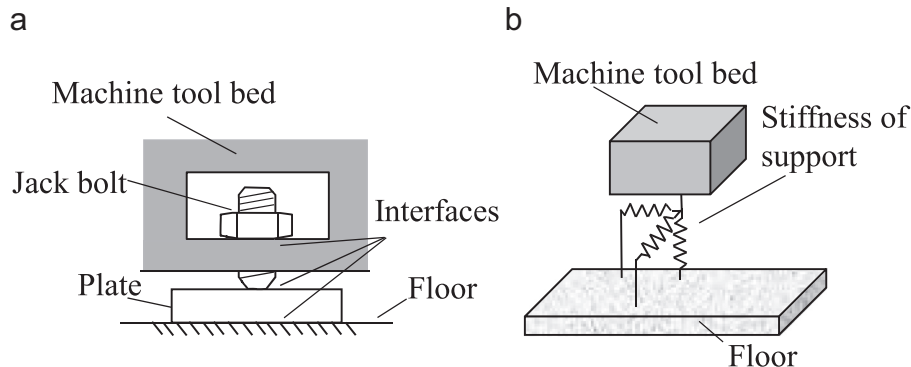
Machine tool support and its model. (a) Schematic drawing of screw jack, and (b) 3D stiffness model of support.
